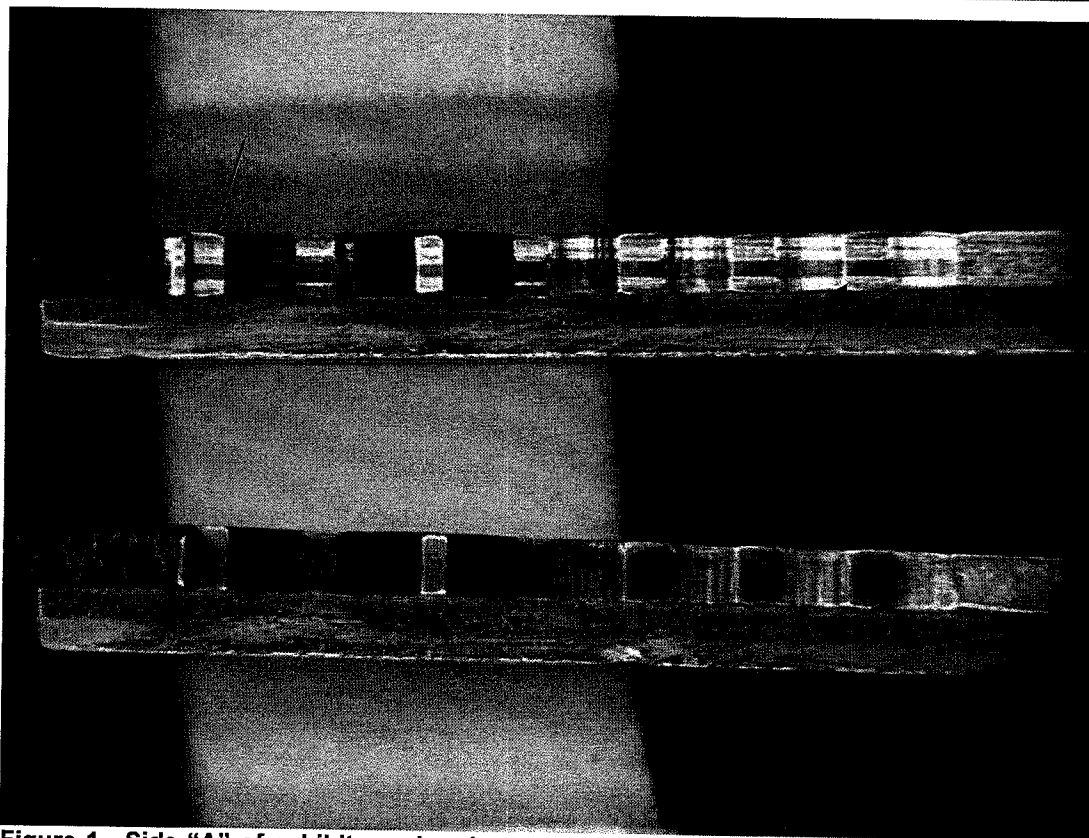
Side "A" of exhibit number 1 on top, indicating tool markings caused by a key duplicating machine
